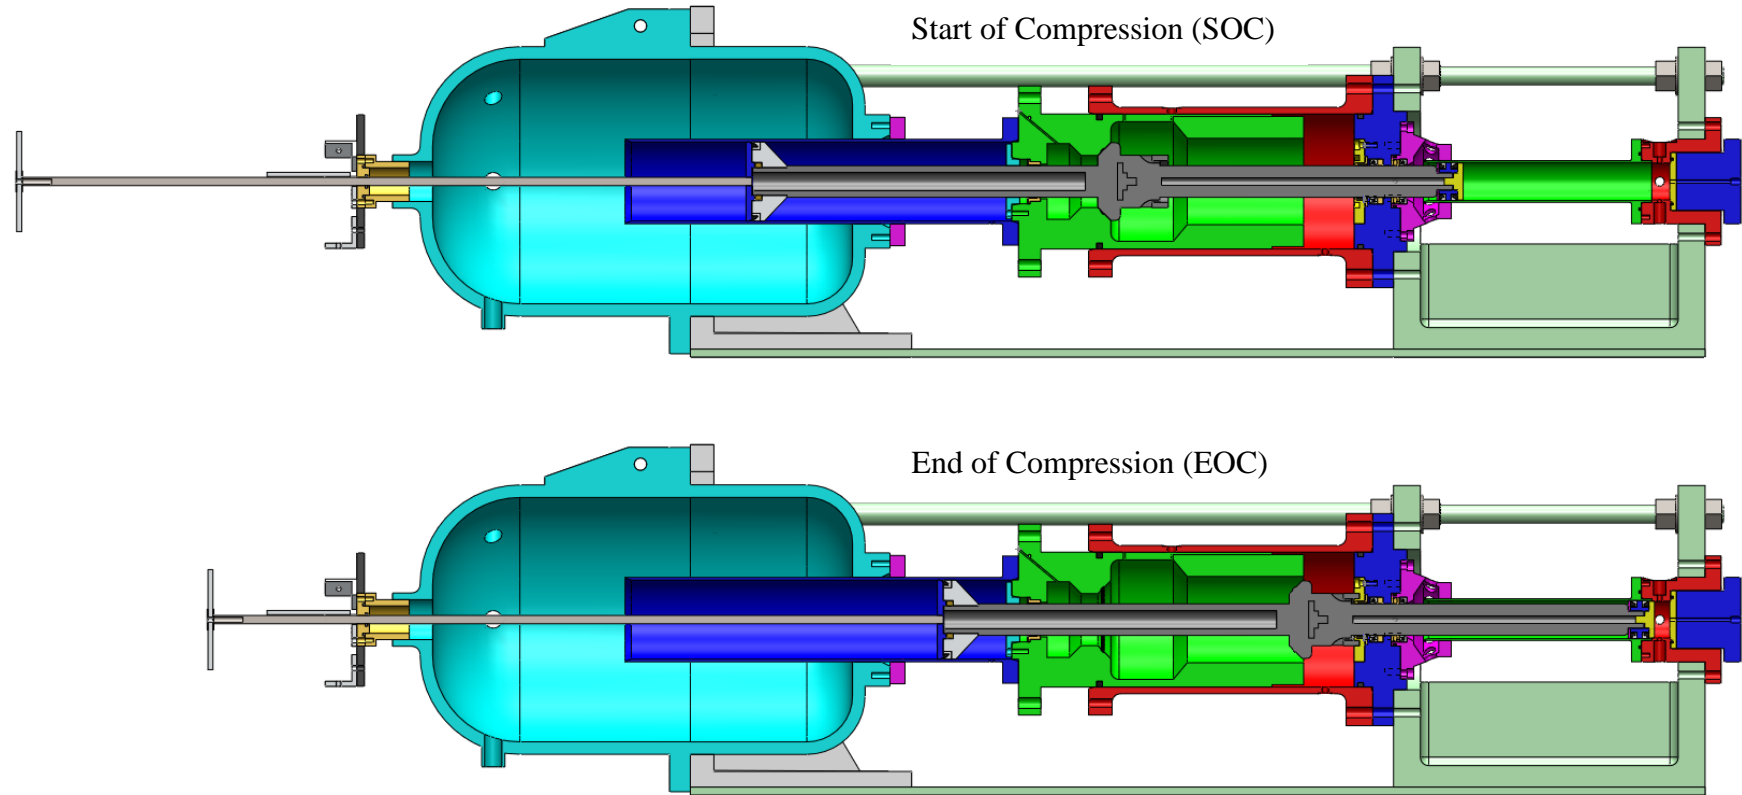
SolidWorks model cross section view to show piston rod assembly in SOC (top view) and EOC (bottom view).
